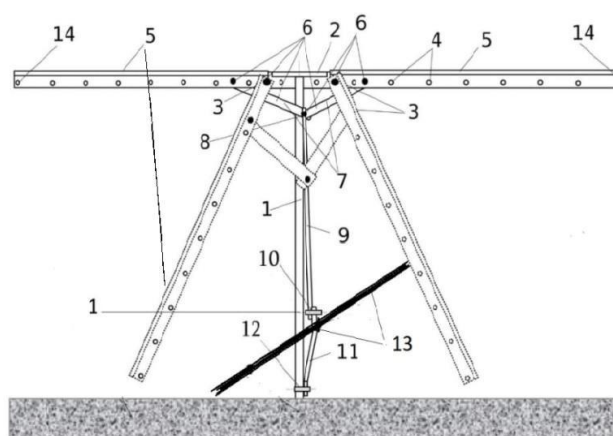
Technical drawing of the T-shaped Mobile Trellis
